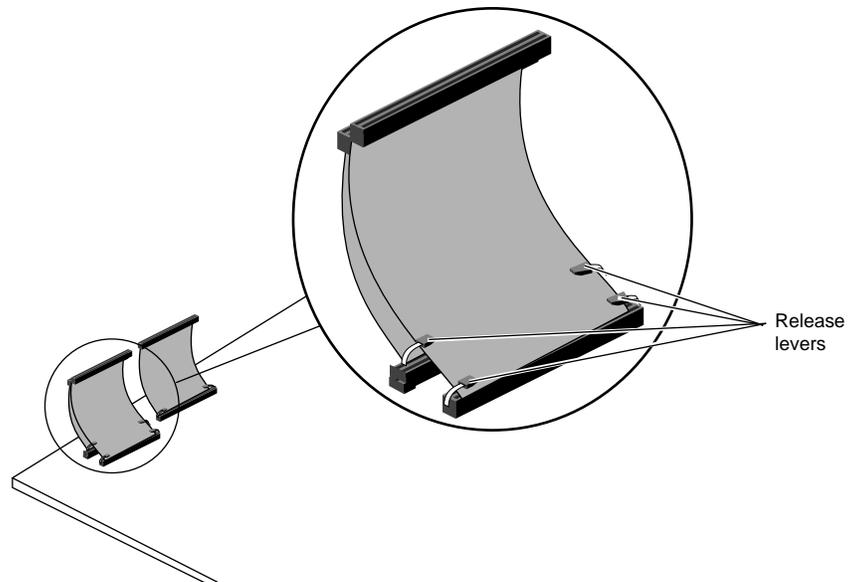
Slipping the Inner Cable Through the Outer Cable Levers
